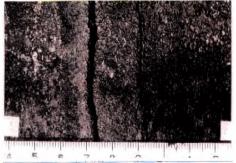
<u>2</u> Grooving corrosion of welding of bottom plating
